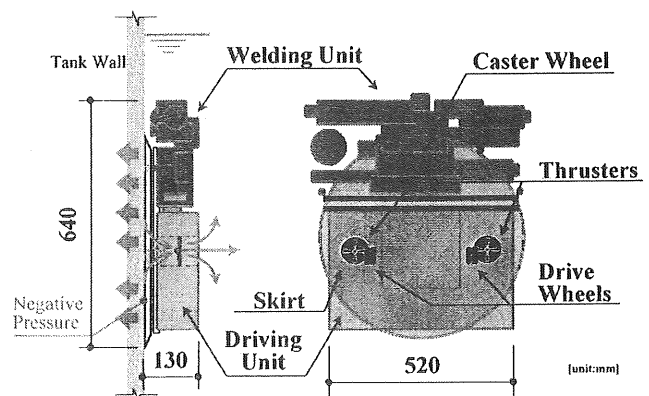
Illustration of YAG-laser repair welding robot
